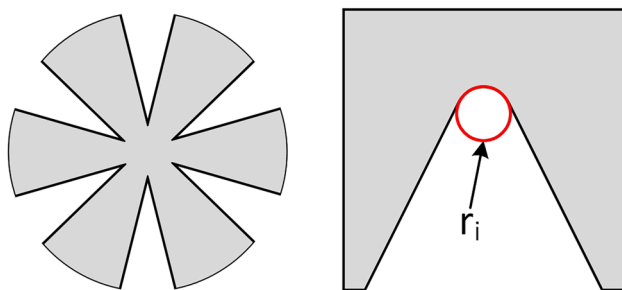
Top view of the test geometries for investigating inner edges (left) and measuring principle (right)
